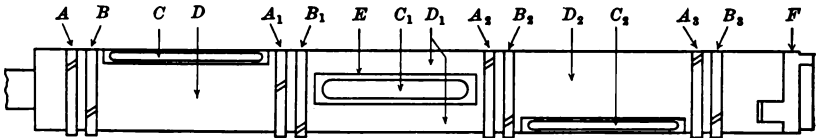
SPEEDWELL CYLINDRICAL VALVE
